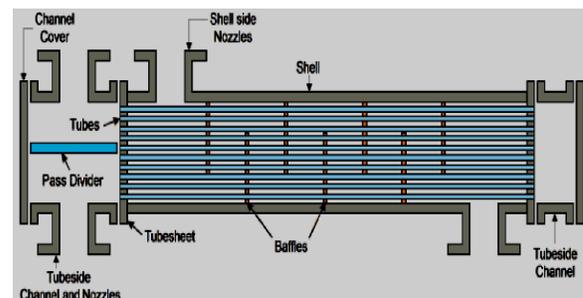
Component Schematic of Shell and Tube type Heat Exchanger.
